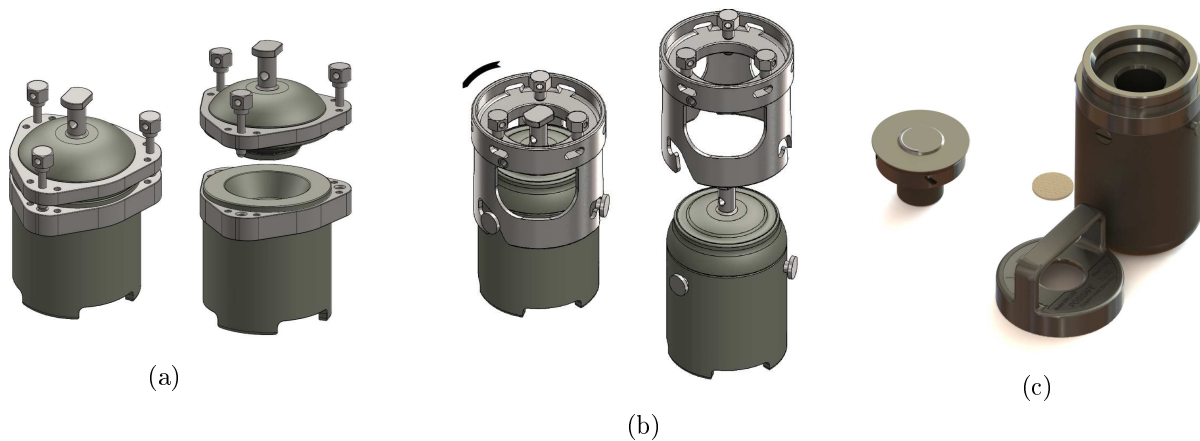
Examples of studies on the inner shielded container of the type B package.
